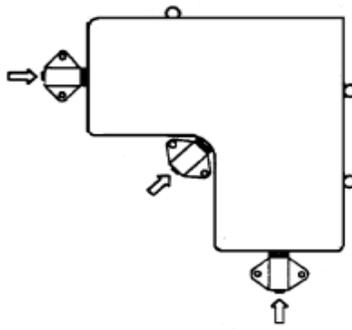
Spring-loaded locators help ensure the correct location by pushing the workpiece against the fixed locators.
